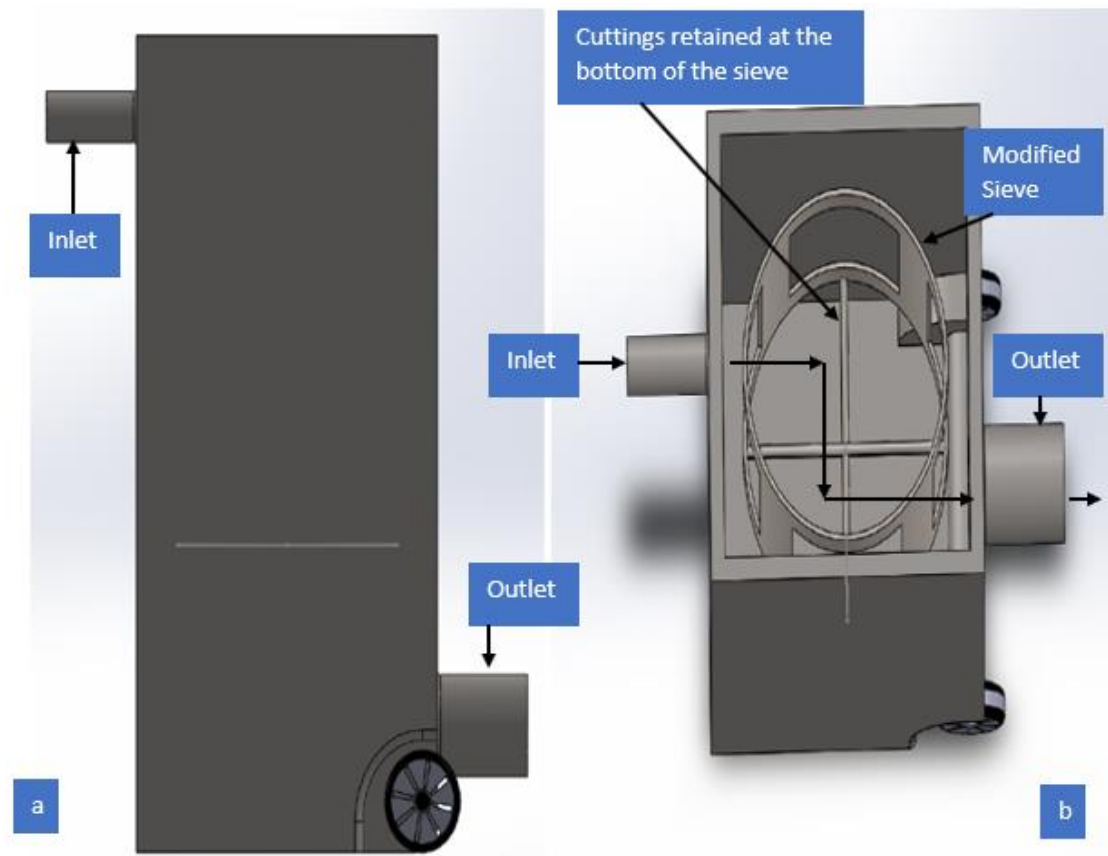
(a) Side view of the cutting collection system and (b) Top view of the cutting collection system
